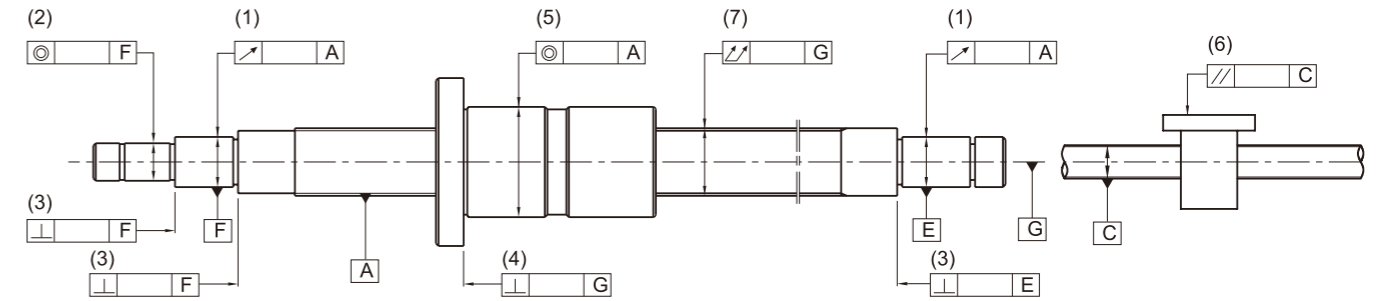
Mounting Accuracy and Tolerance
